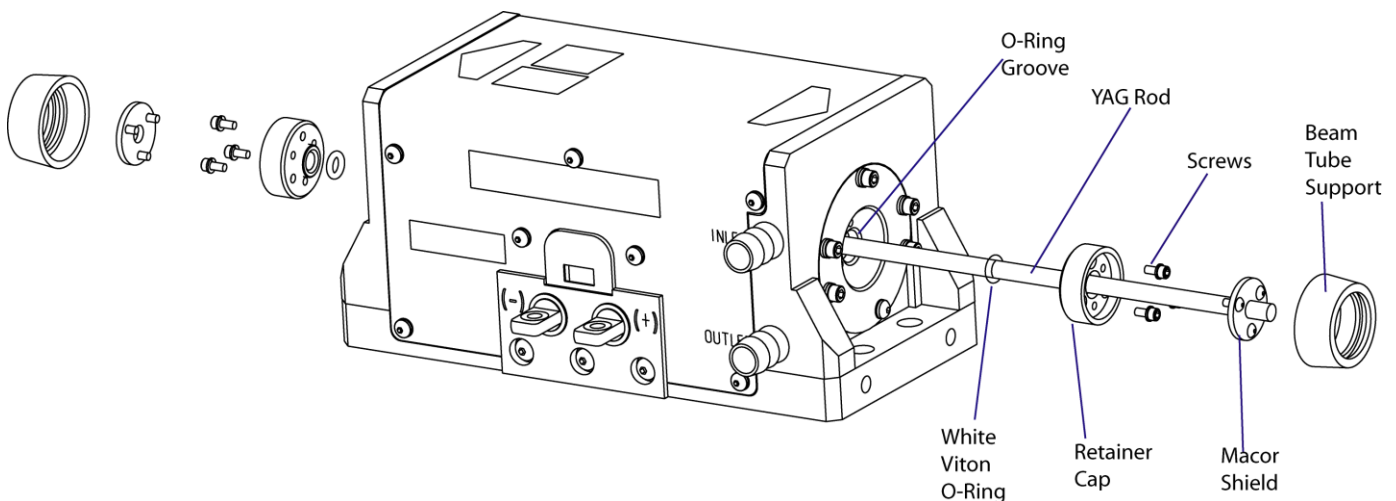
Rod Replacement Drawing, REA-XXXX-001X
